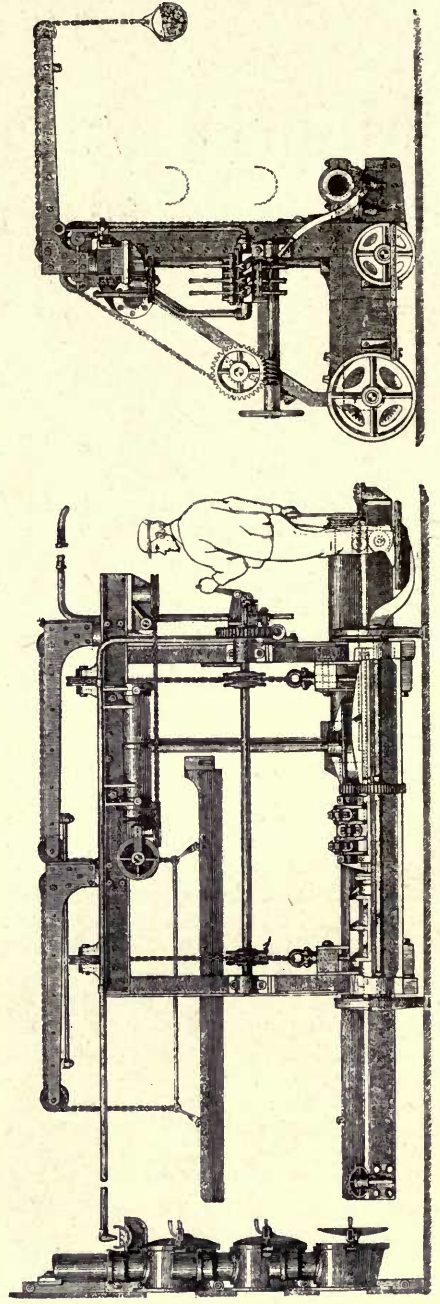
FOULIS-WOODWARD HYDRAULIC CHARGING MACHINE.
